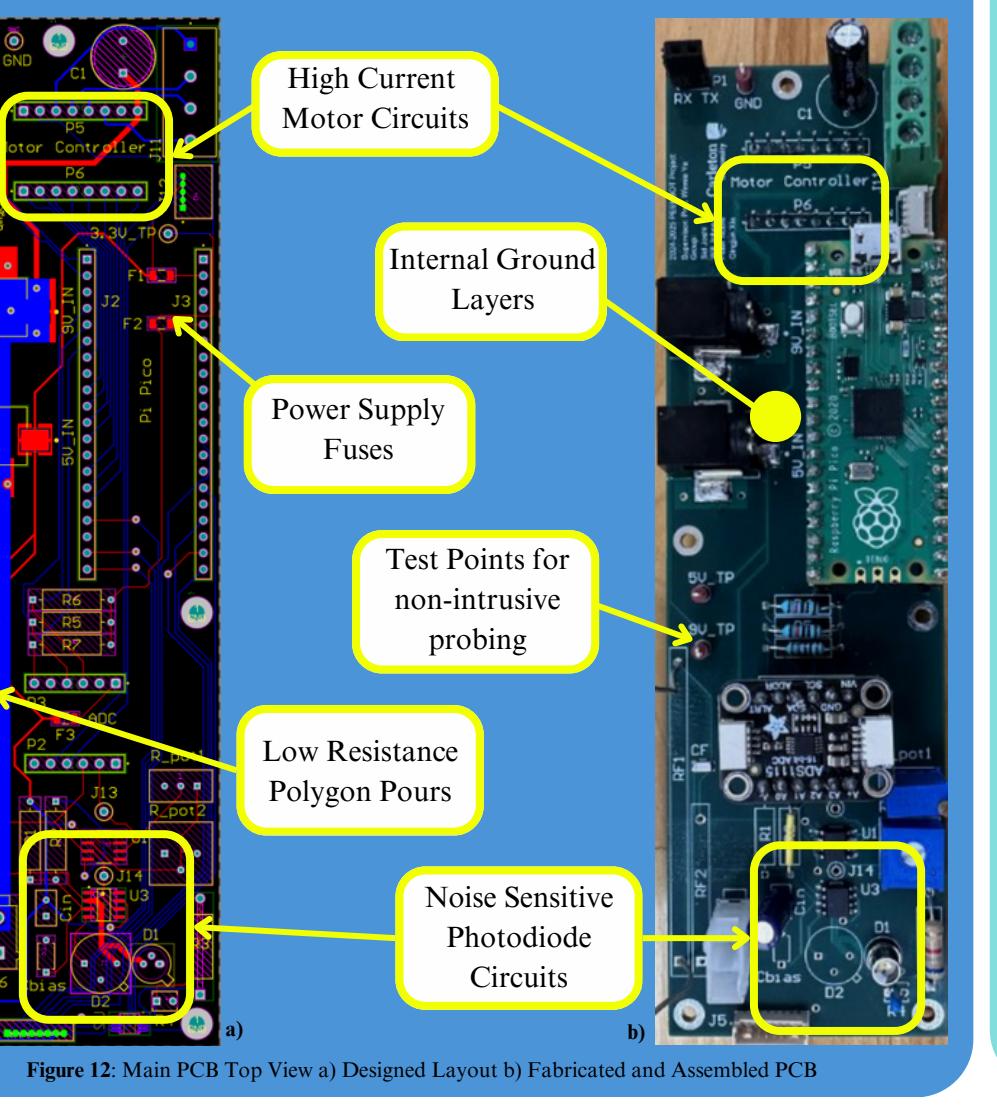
Main PCB Top View a) Designed Layout b) Fabricated and Assembled PCB
